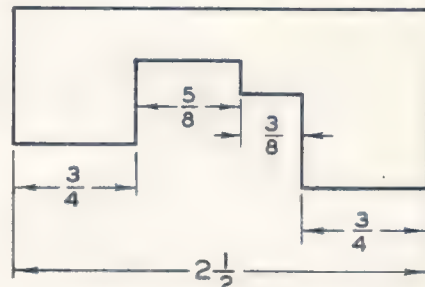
PLACING DIMENSIONS BETWEEN VIEWS
